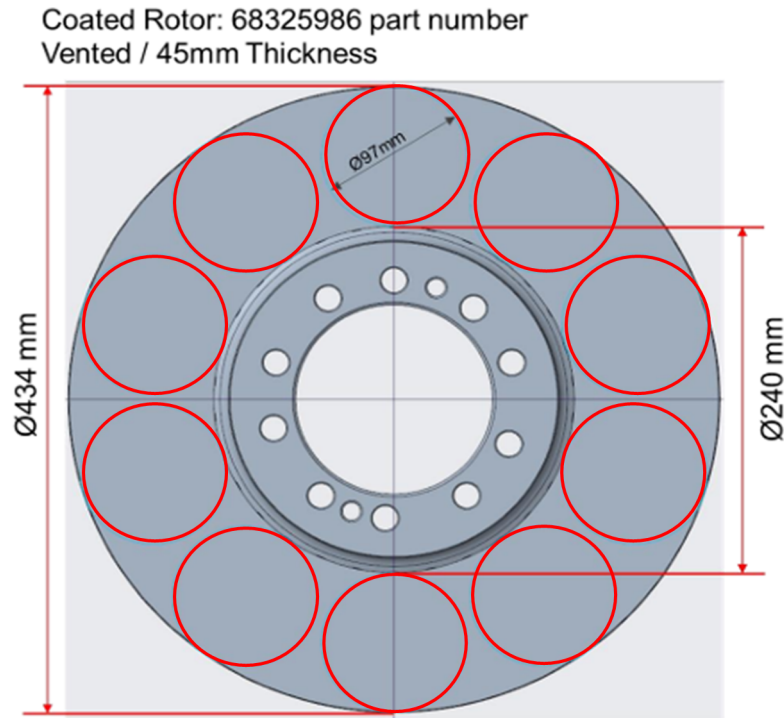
Drawing of small-scale brake rotor samples to be cut from full-scale commercial laser-clad GCI rotor.
